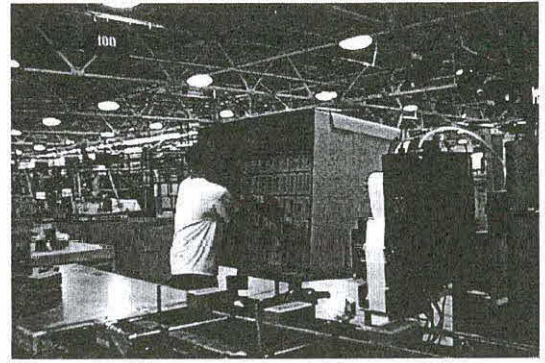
Placing corrugated cases into a triwall positioned on the lift / tilt pallet jack.
